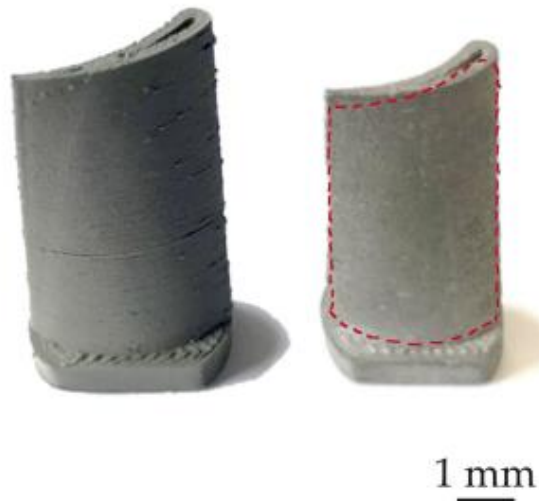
316L SS specimen before and after sintering showing layer lines and stringing [1].
